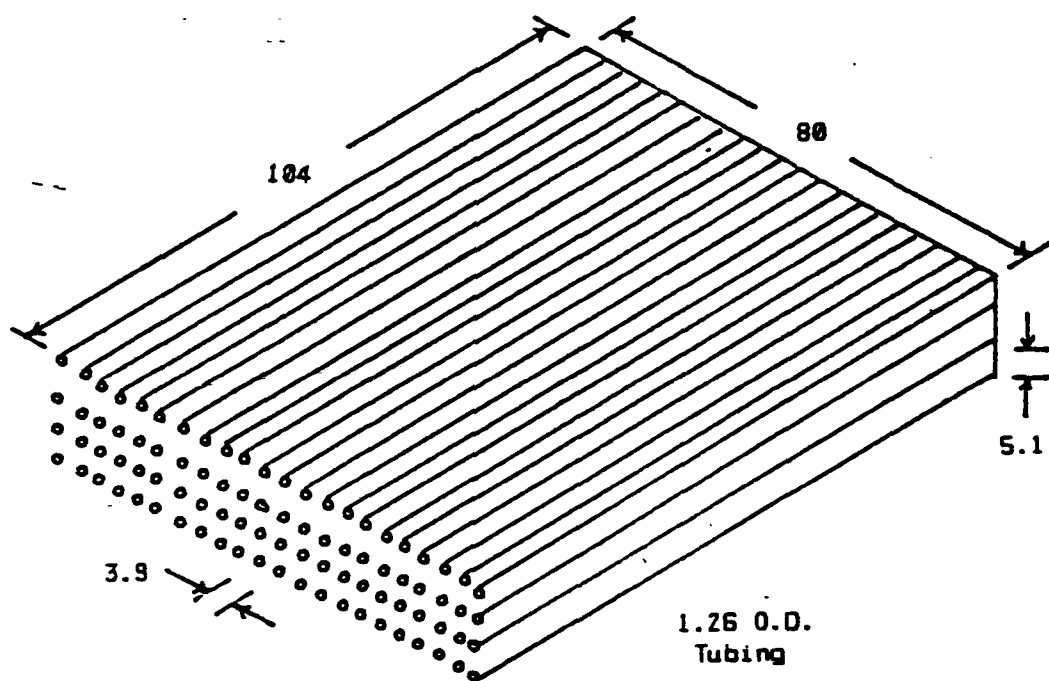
Heat Exchanger Tube Design Showing The Four (4) Rows of 22 Tubes. All Dimensions in cm.
